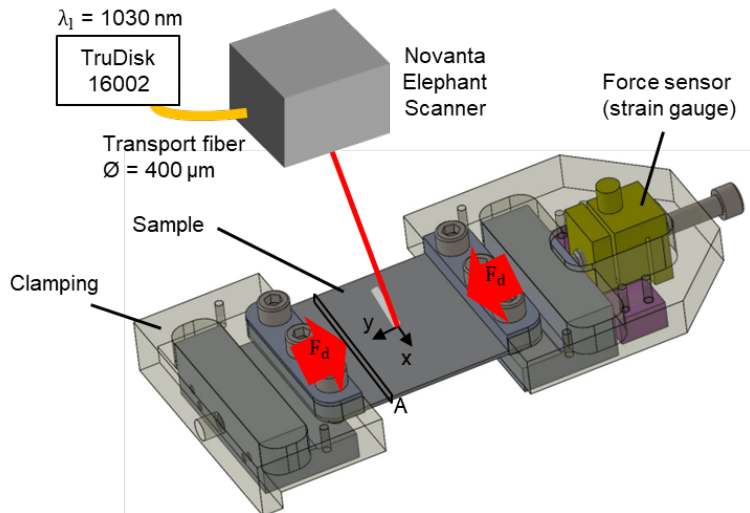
Experimental setup to apply external compressive stress during welding.
